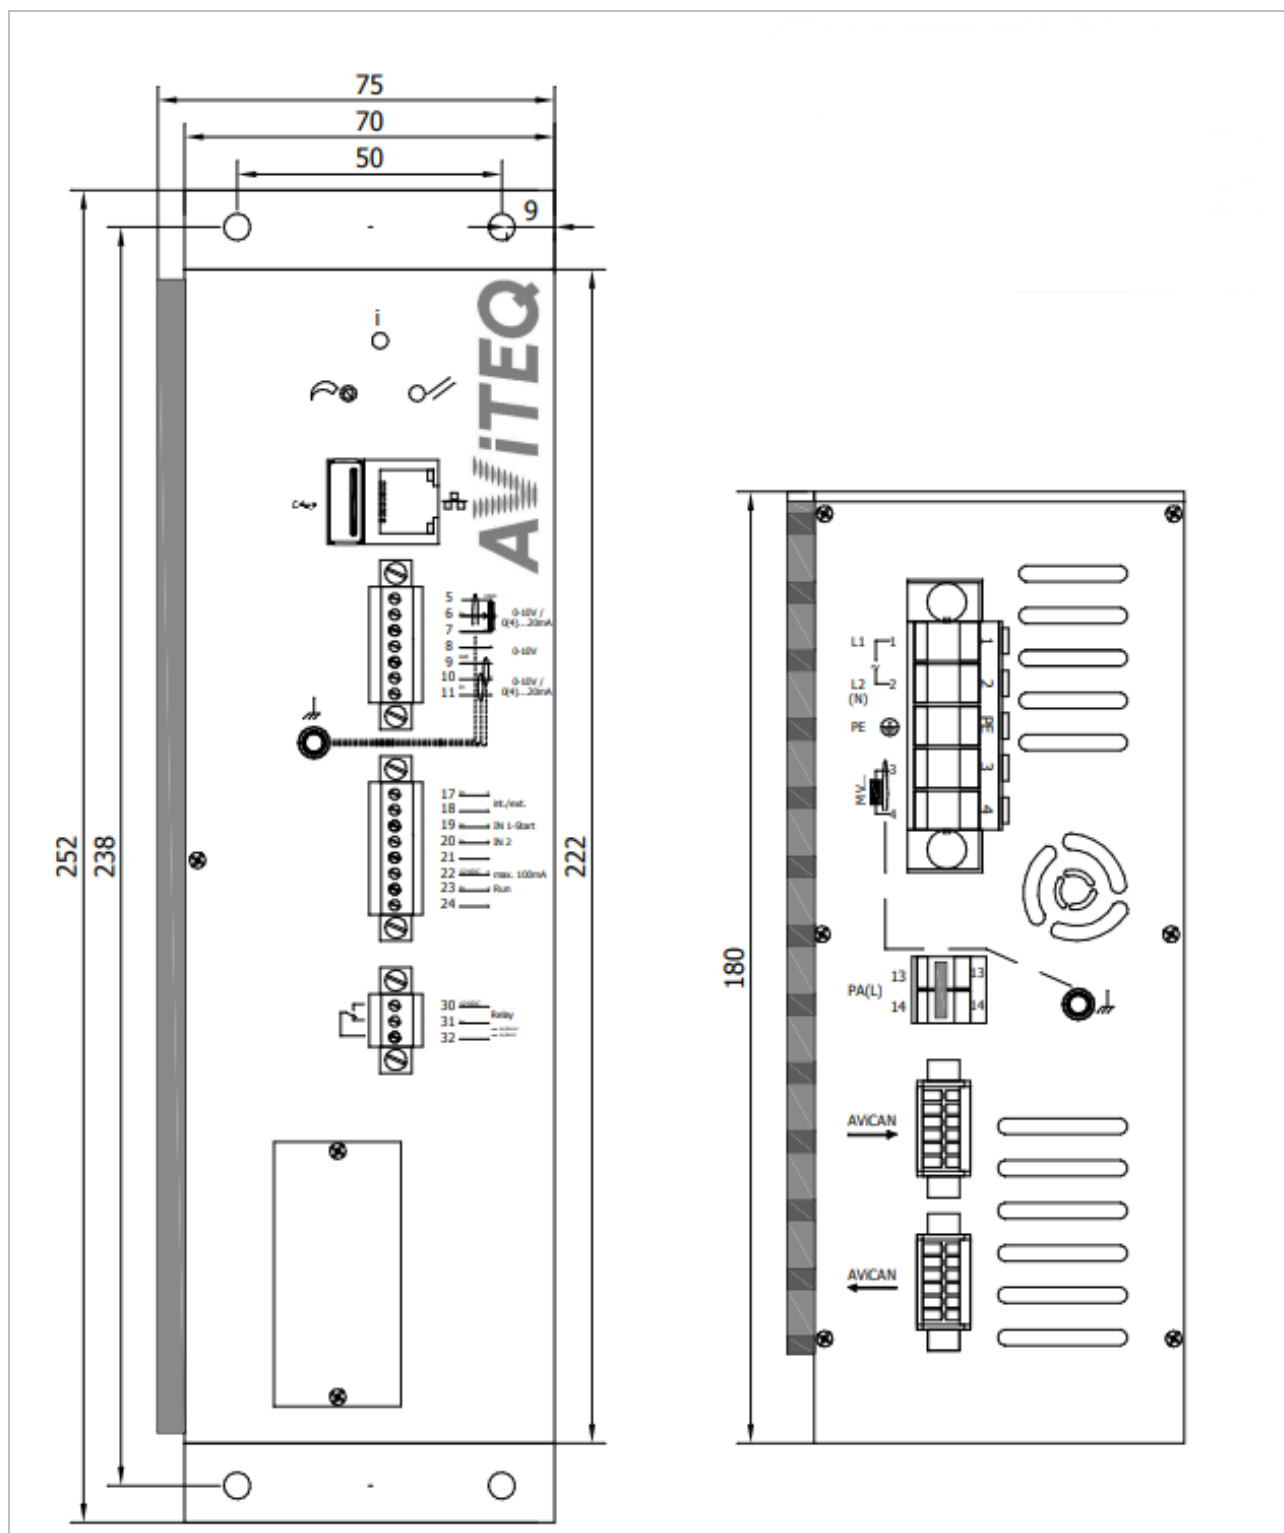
Dimensions SDE15/...-2 – left front view - right bottom view
